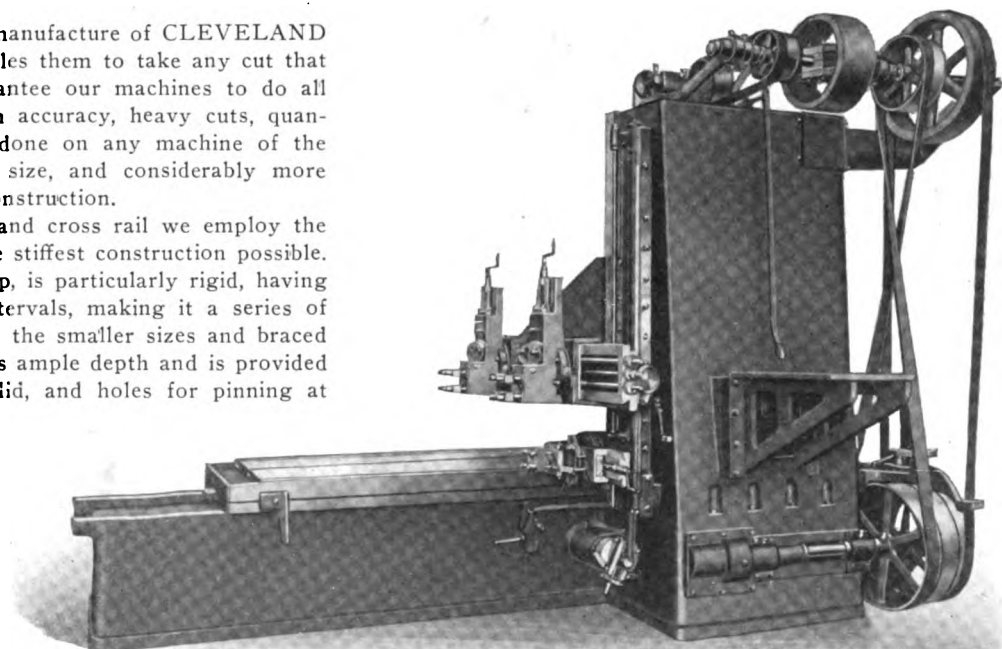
60" x 60" x 14' "CLEVELAND" Parallel Drive, Arranged for Belted Motor Drive.
